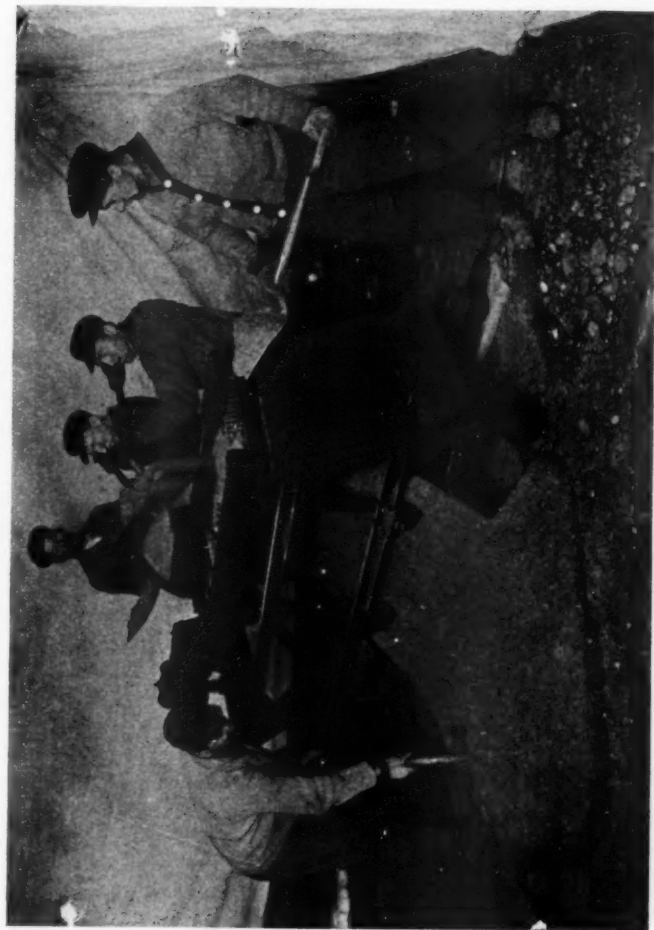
DEANE PNEUMATIC SAND RIDDLE RECTANGULAR TYPE.
